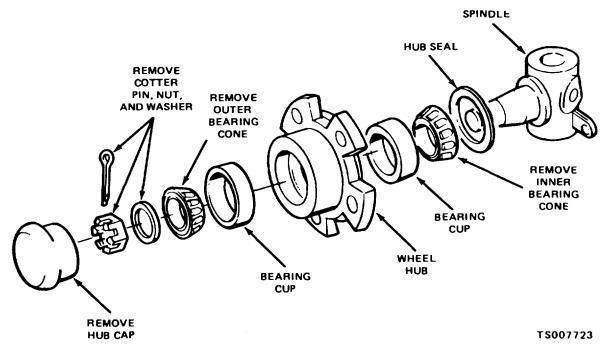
Wheel Bearings and Hub, Disassembly and Reassembly
